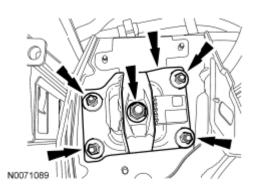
Locating Engine Mount Nuts Courtesy of FORD MOTOR CO.
